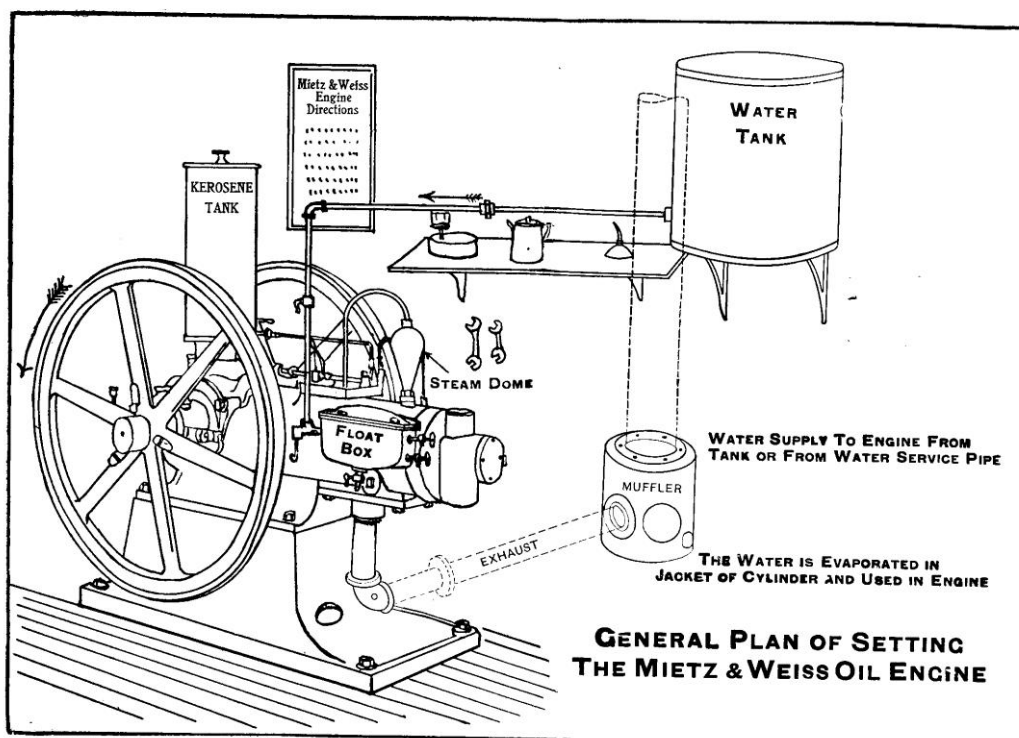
Oil Tank may be placed on floor alongside of engine outdoor or underground, if necessary.
